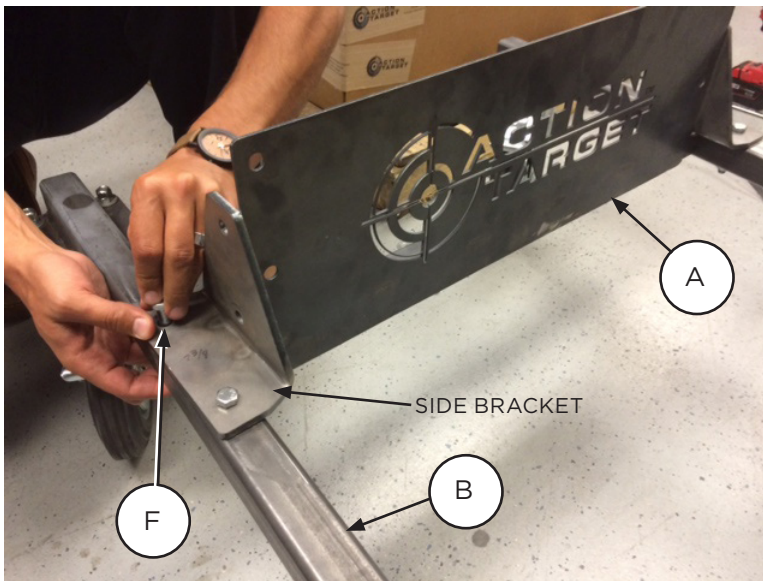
INSTALL CROSS BAR TO WHEEL BARS
